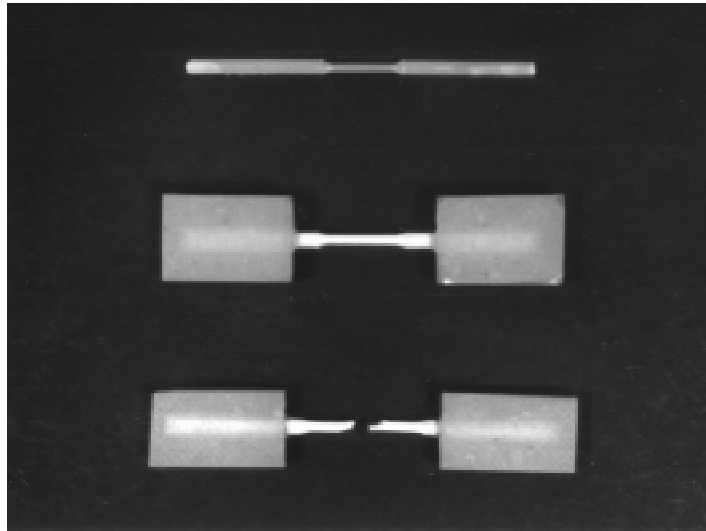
Hydrostatically extruded samples after machining, embedding and tensile testing
